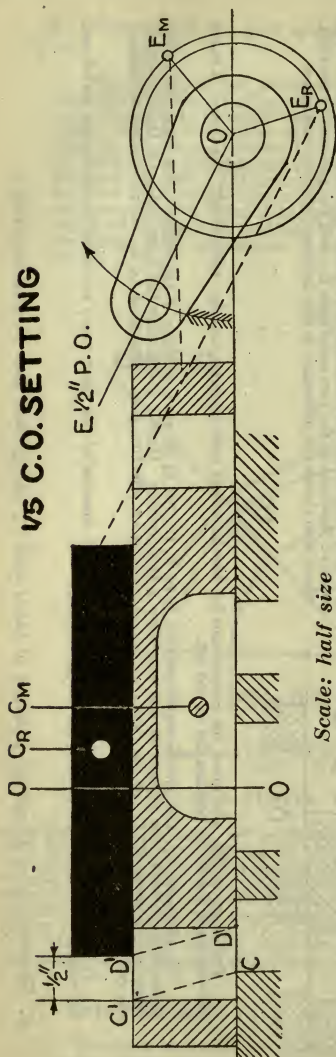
and 467.—Position of modified main valve and riding valve at $\frac{1}{5}$ cut off. A detail of one end of main valve is shown in fig. 467 in extreme position from which the complete valve is drawn in cut off position. The relative positions of the two eccentrics E_m and E_r , are seen at the right, which also shows the difference in the throws of the two eccentrics.
